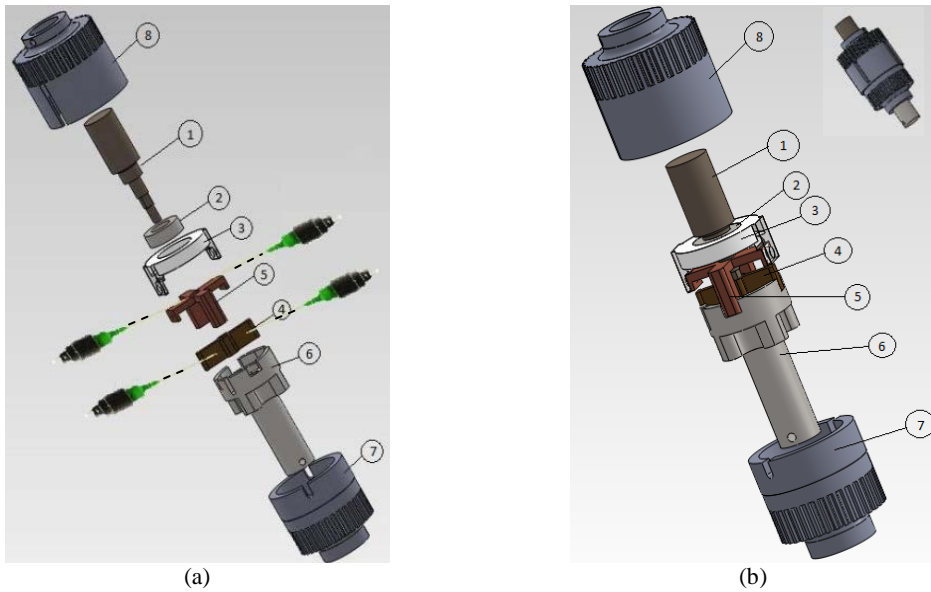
2DOF force/torque sensor with radial FBG installation, first design: (a) exploded view, (b) assembled sensor (1-square cross section shaft for torque transmitting; 2- ball bearing; 3- part for transmitting axial force; 4- active element for axial torque; 5- active element for axial force; 6- base and shaft; 7 and 8 are casings).
